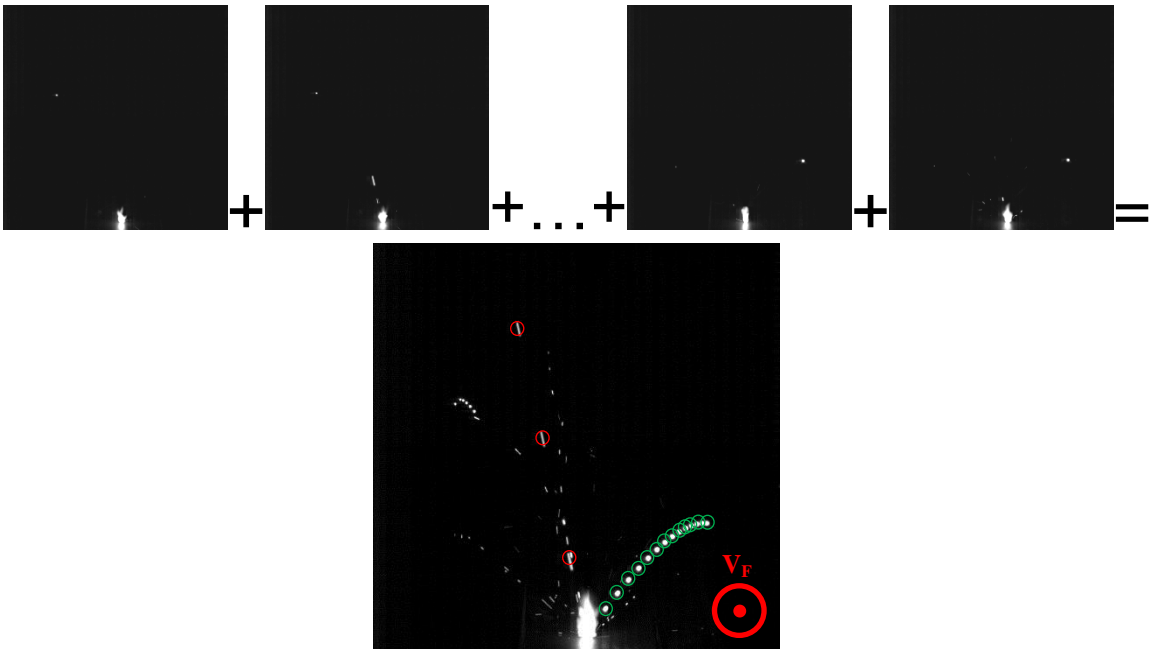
Superposition of 17 single frames to a summarized picture of the welding process to display the spatter occurrence when welding with sinusoidal beam oscillation; $P_L = 2.5$ kW, $f_y = 100$ Hz, $w_y = 1.5$ mm, $v_B = 6$ m/min.
